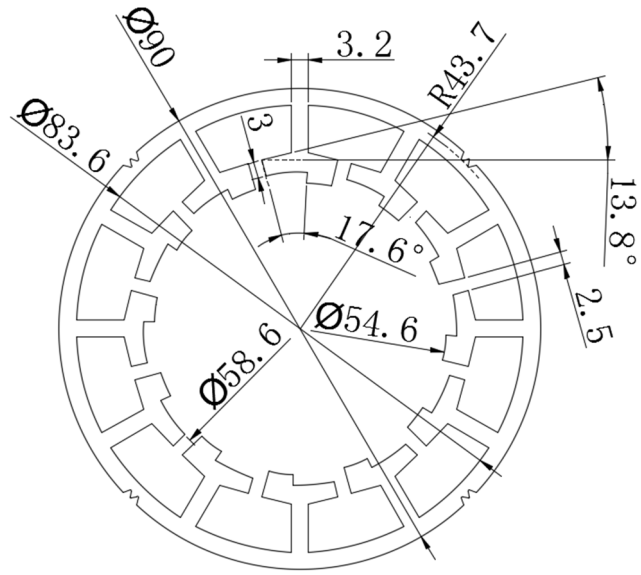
12-slot stator dimensions for 12/14 CPM-FRPM machine.
